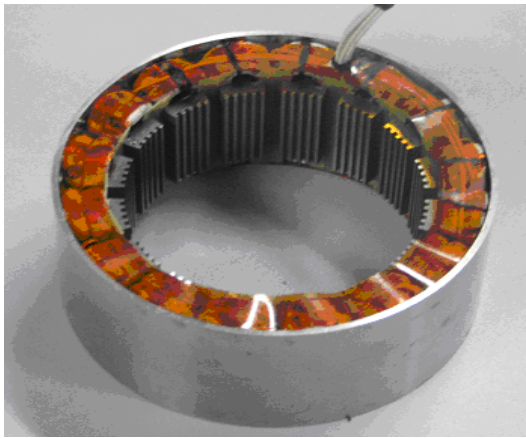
Stator and Rotor Assembly of the fabricated Hybrid Stepper Motor.
